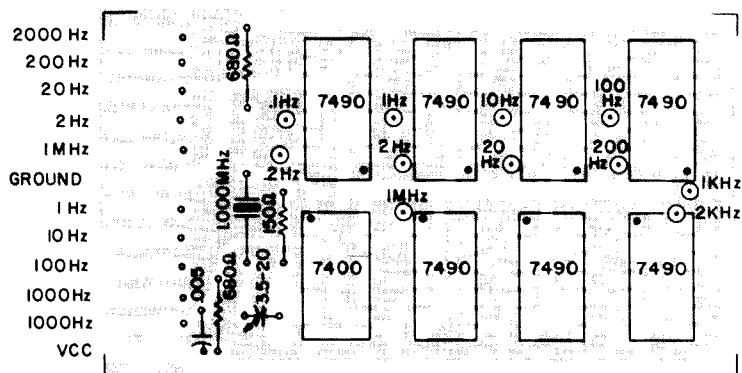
(b). TBOD component layout. Use jumpers to bring frequency outputs to edge. 1 board per counter. Dot indicates pin 1.
